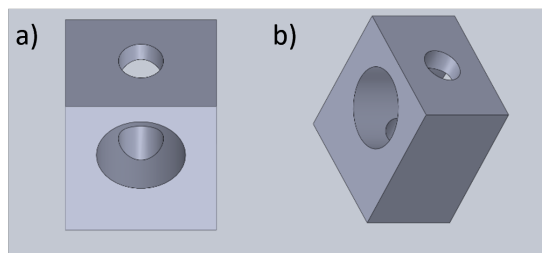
Perspective views of cutting machine adaptation *SolidWorks* initial model: a) inclined lateral view; b) inclined top view.
